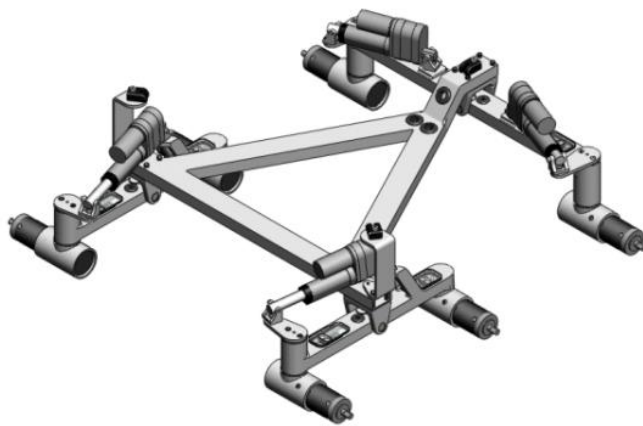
The chassis design, featuring a bogie-type suspension to passively conform to complex terrain, direct motor drive to each wheel, and linear actuator steering control.
